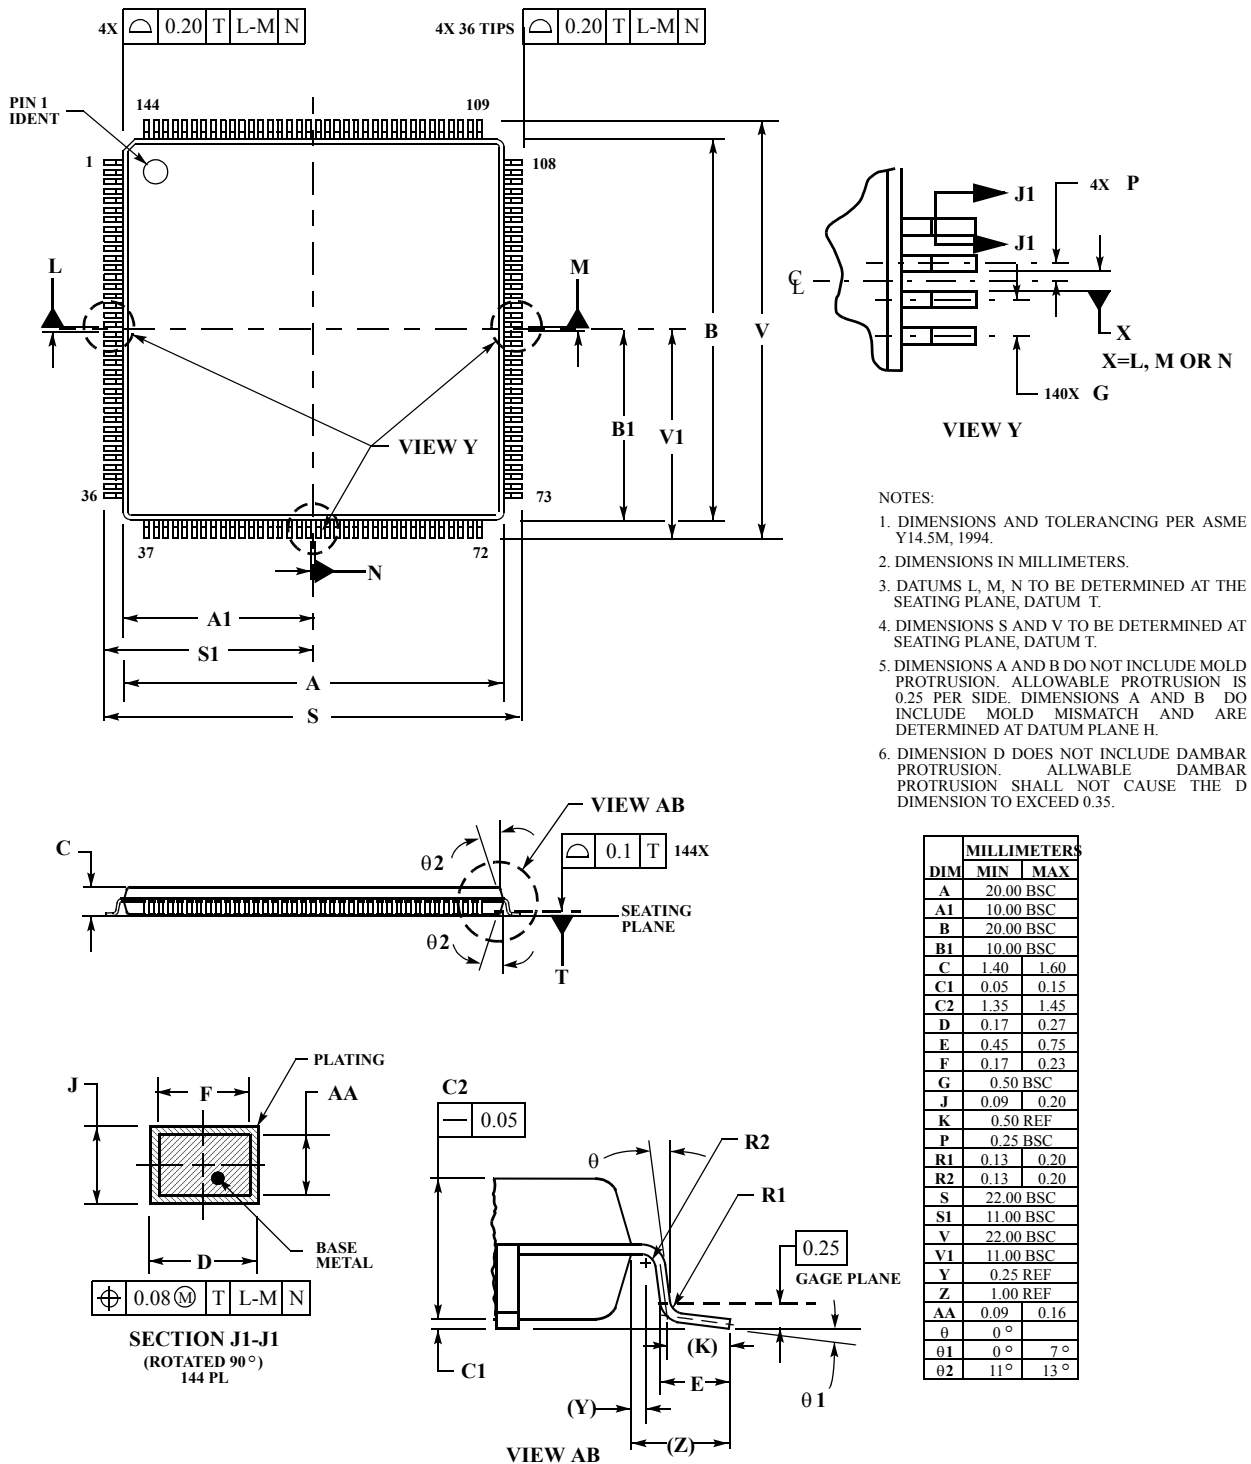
144-Pin LQFP Mechanical Dimensions (Case No. 918)
